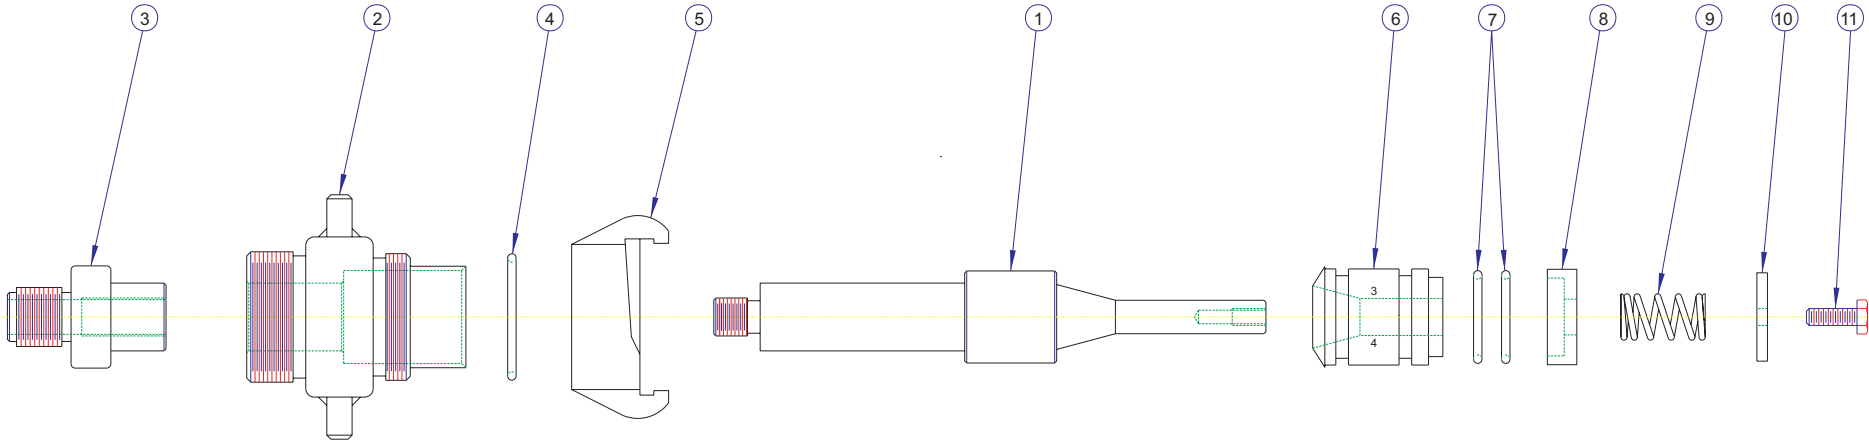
The coupling adapter must be positioned so the collet's flange grabs the expansion ring and not an inner flange of the coupling.
